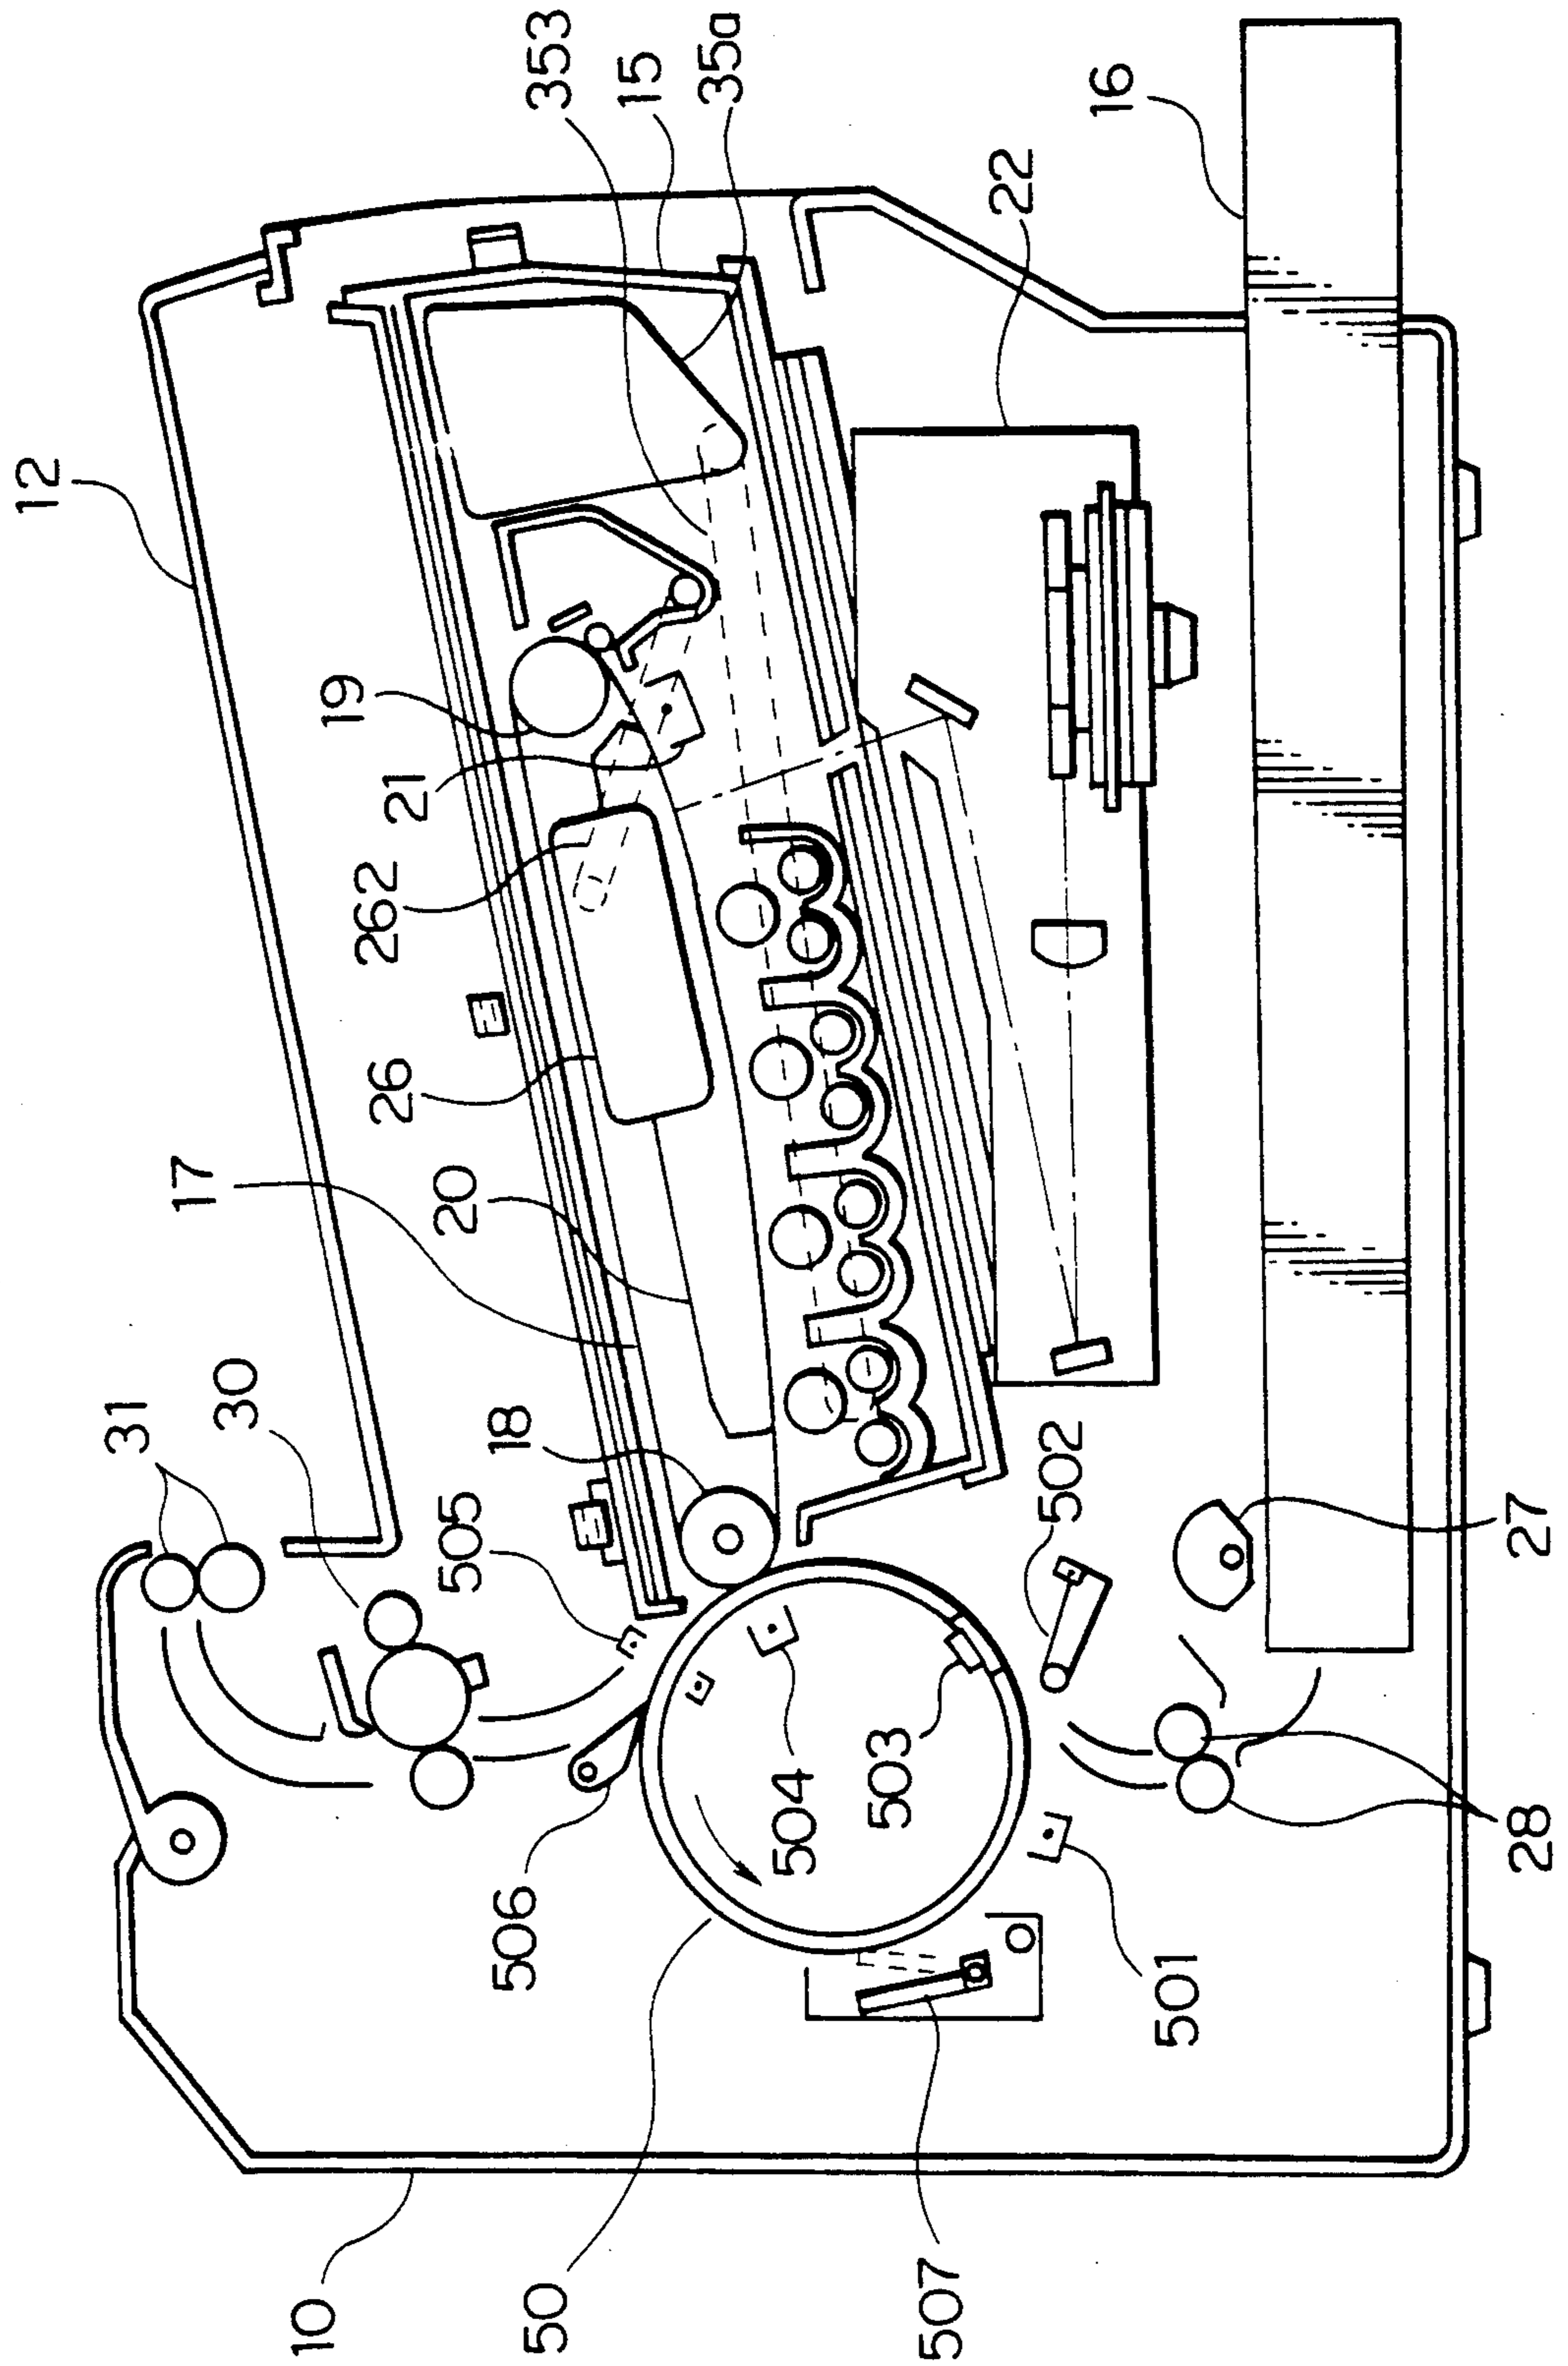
IMAGE FORMING APPARATUS HAVING AN DISMOUNTABLE PROCESS CARTRIDGE
